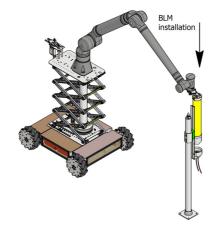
Full robot assembly for the pole setting intervention (left) and the BLM detector assembly insertion (right).
